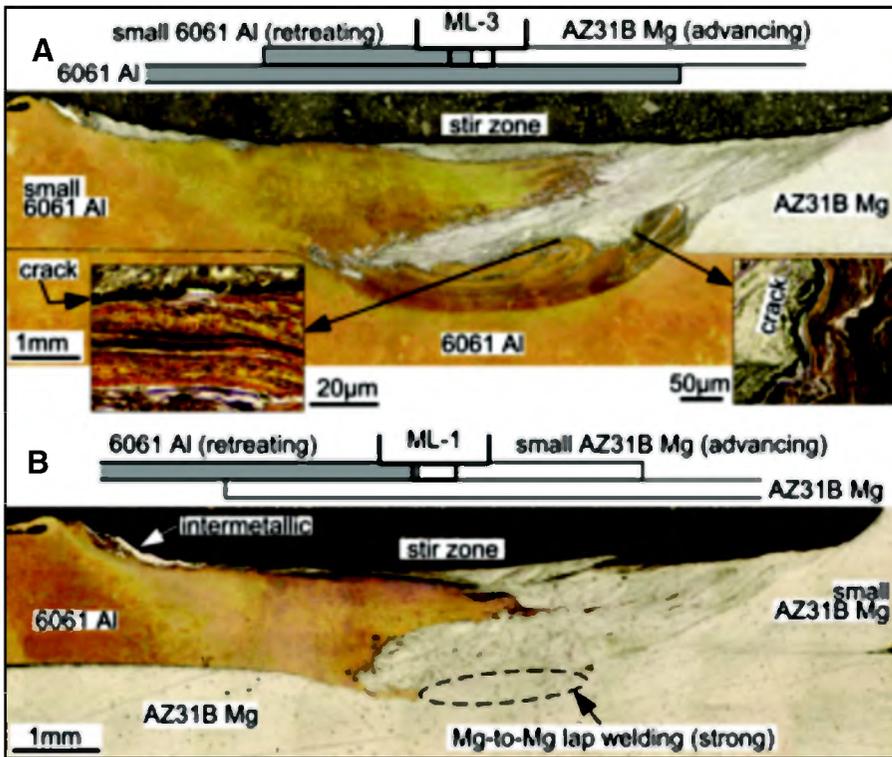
Transverse cross sections of welds in modified lap joint. A — Weld ML-3; B — weld ML-1. In B the gray straight lines in AZ31 Mg are twin lines instead of scratches from polishing.
